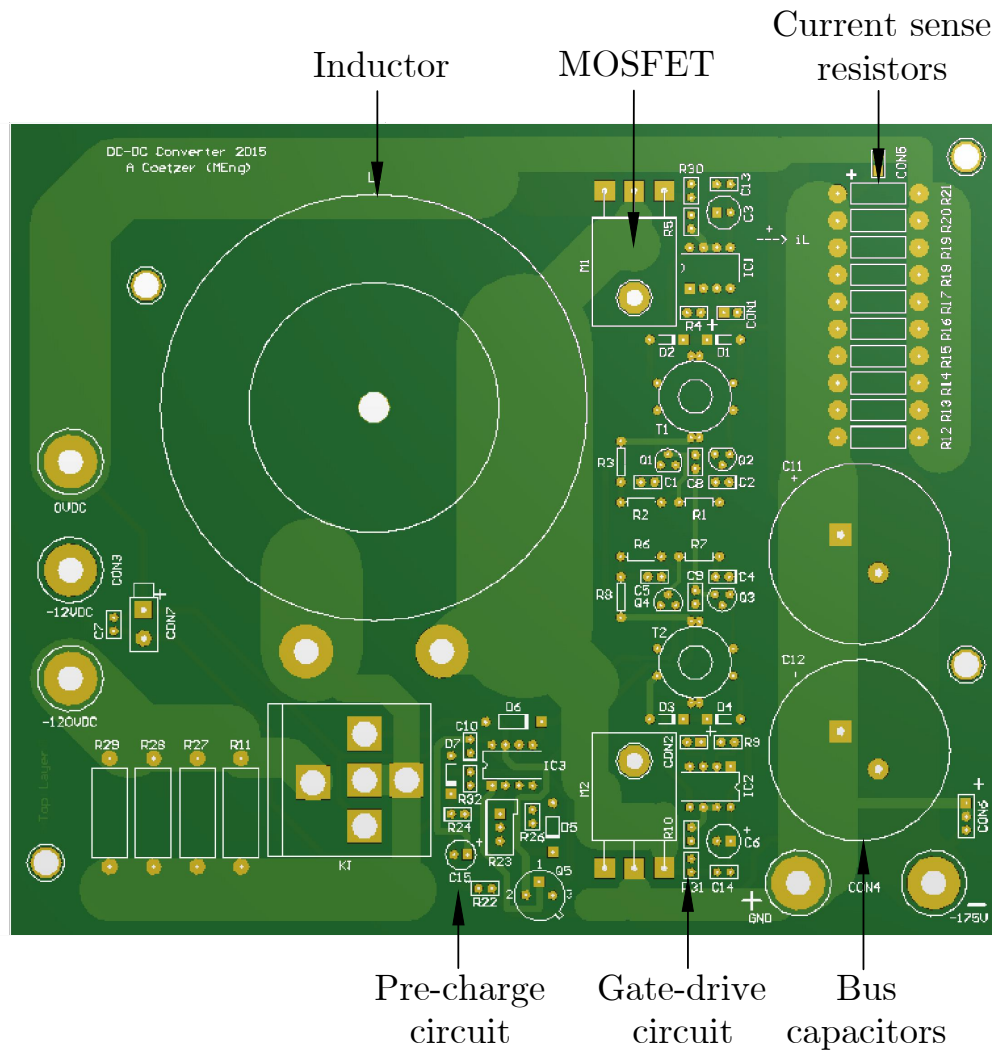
PCB for the bottom-half of the dc-dc converter circuit producing -175 V.
